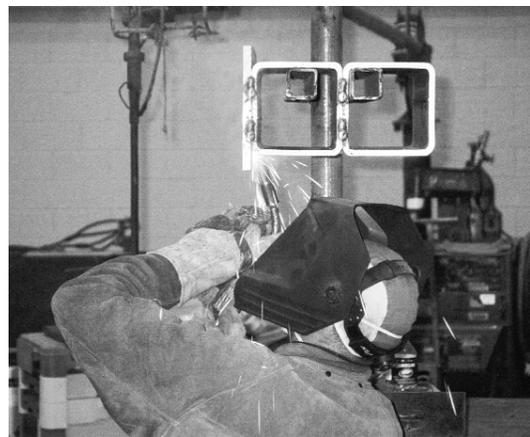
Overhead Welding of a Test Specimen at Walters Inc.
